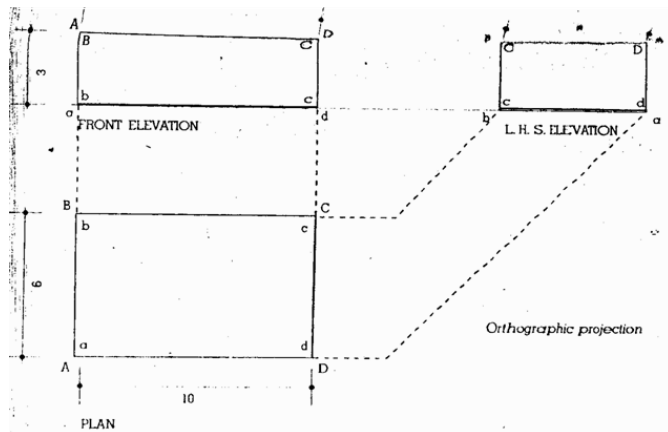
Projection of Plan, Front Elevation and Left Elevation
